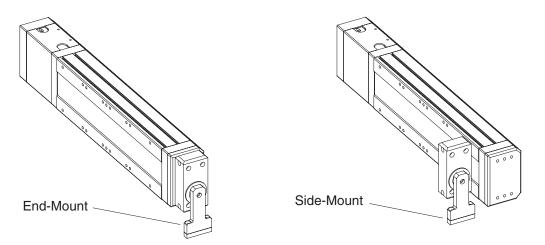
L12 Gantry Mounting Methods, End and Side
